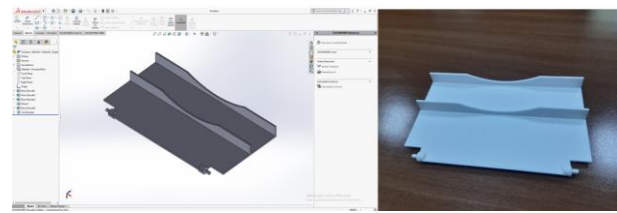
Drawing of the shutter on the pool and a prototype of the shutter made by 3D printing
